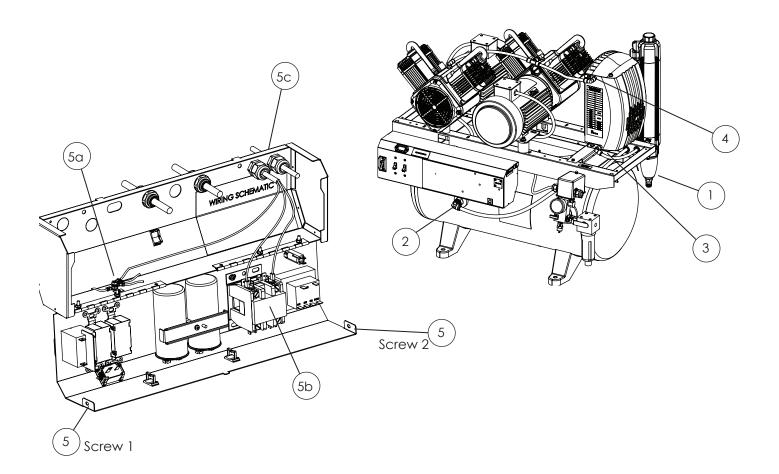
Cooler/Dryer Flamex Hose, Power and Wire Harness Connection Locations
